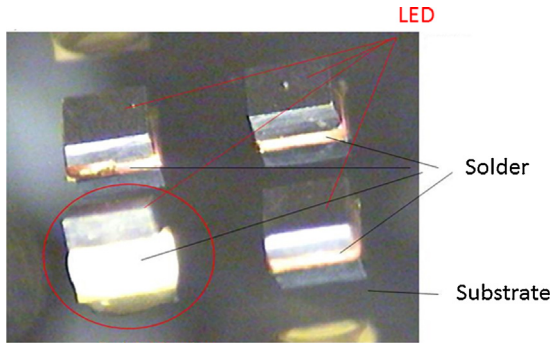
Left: tilting of a LED deposited on a liquid solder.
